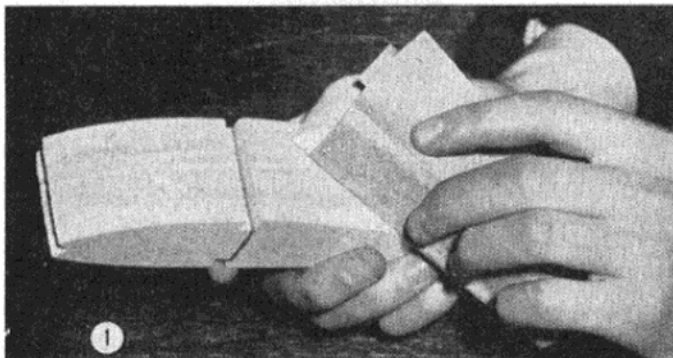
shows the wing ribs pinned together and being sanded to remove sawing marks.
